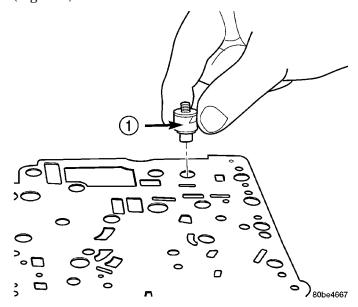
Remove Overdrive Clutch (#5) Check Valve
